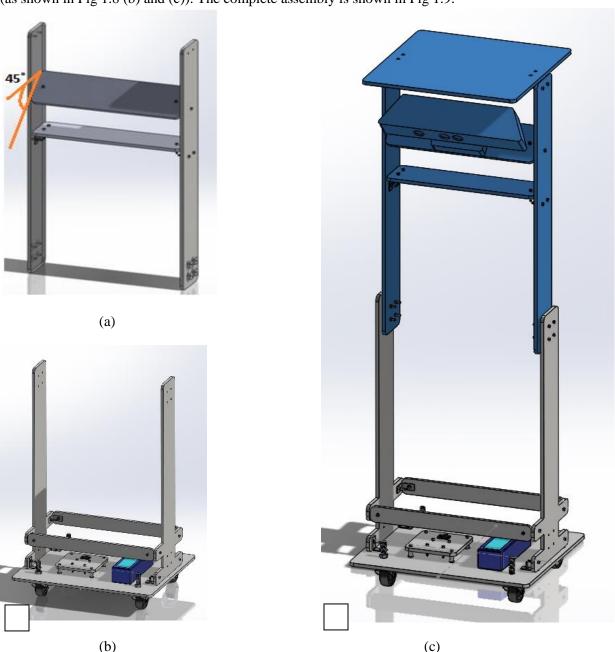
(a): Part 2 is mounted at an angle of 45° with the horizontal. (b) Lower assembly for detecting REAL stairs (exactly identical to that of MODEL stairs). (c) The Upper assembly is fastened to the Lower assembly using the 30 mm M3 Screws near the top of the Part 3 pieces.
